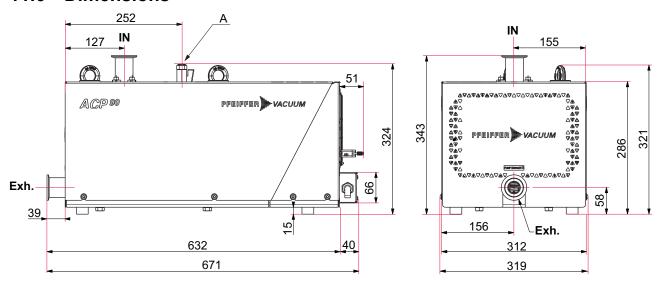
Dimensions (mm) ACP 90 (version SD / version G)
